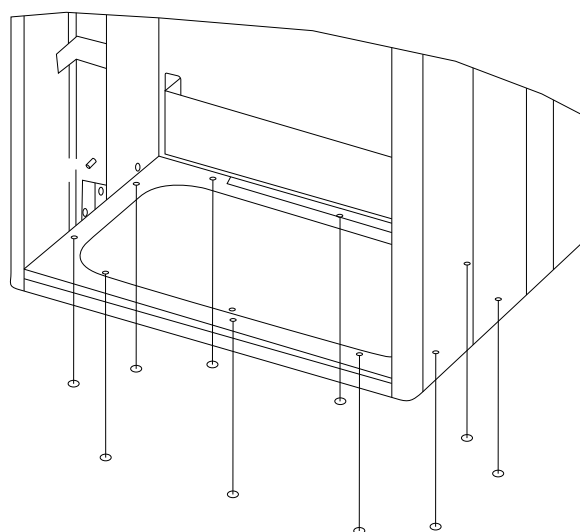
Mounting of Bottom Plate, Frame Size E1.
